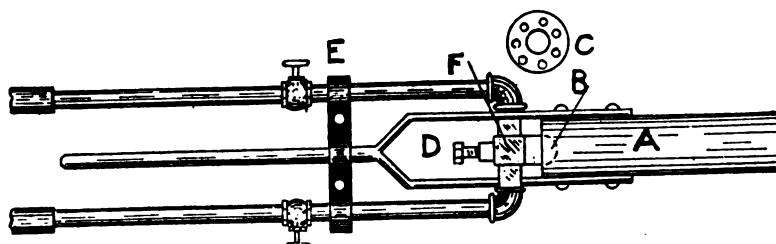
THE OIL BURNER FOR BRAZING AND THE PIPING ARRANGEMENT
